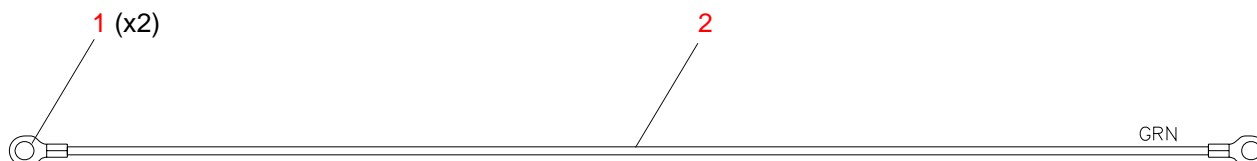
VL500 Pan / Tilt Cable Assembly (Pin Outs)
